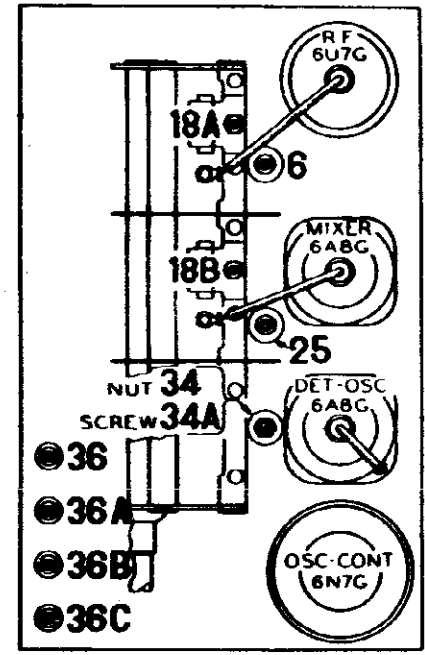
Top View of R. F. Unit Showing Compensator Locations
